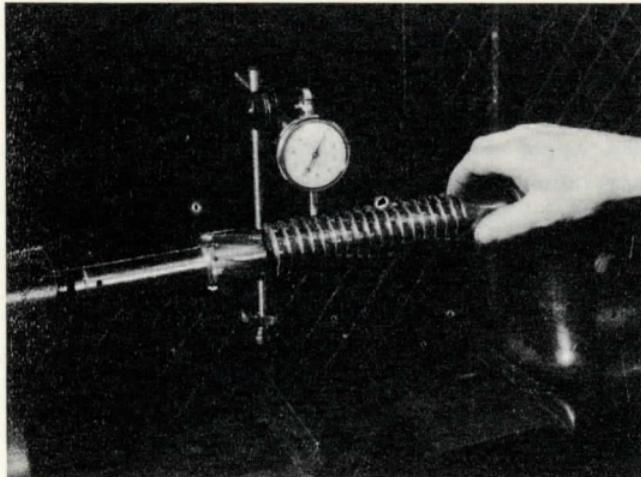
A general purpose Dial Test Indicator checking the cutting edges of a broach.
